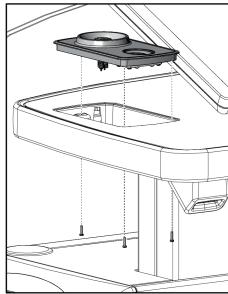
Removing the E-Stop/fingerprint assembly (series I UAWS)
